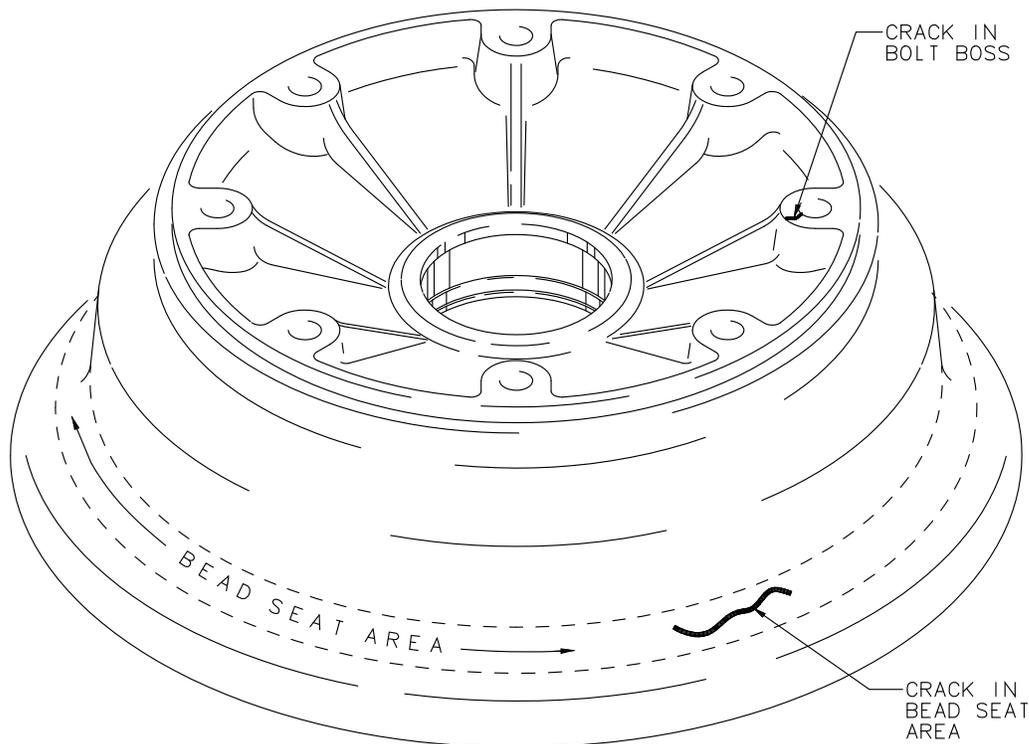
Wheel Half Examination – Inboard Wheel Half Shown
